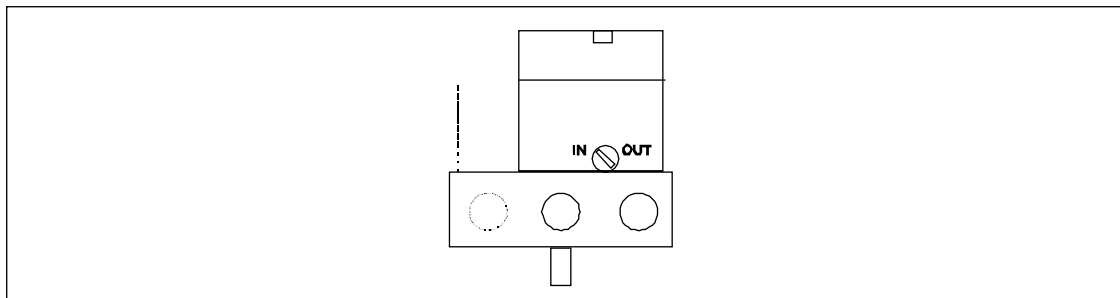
Purging air switch on the valve block, view of the positioner's pneumatic connections with open cover
